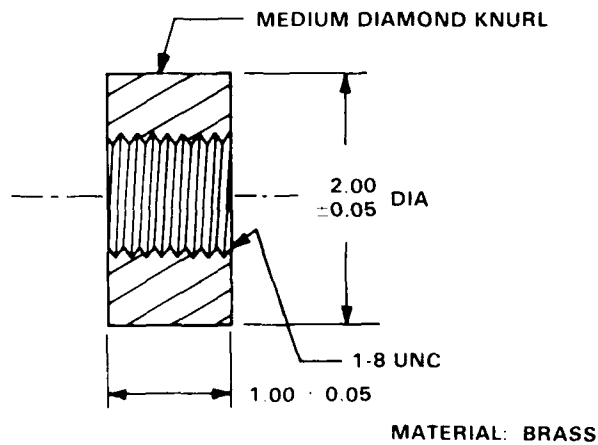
SCHEMATIC OF KNURLED NUT FOR ULLAGE INSPECTION FIXTURE.
